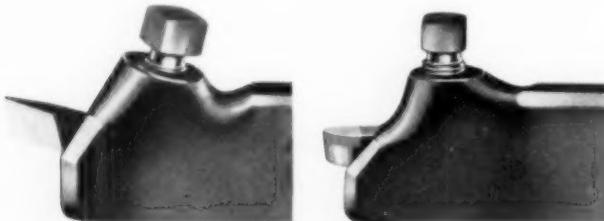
Tool holder at left designed for high speed steel bits; not suited to carbide tools. Holder at right (B) is especially designed for carbide bits. Armstrong tool holders shown.
